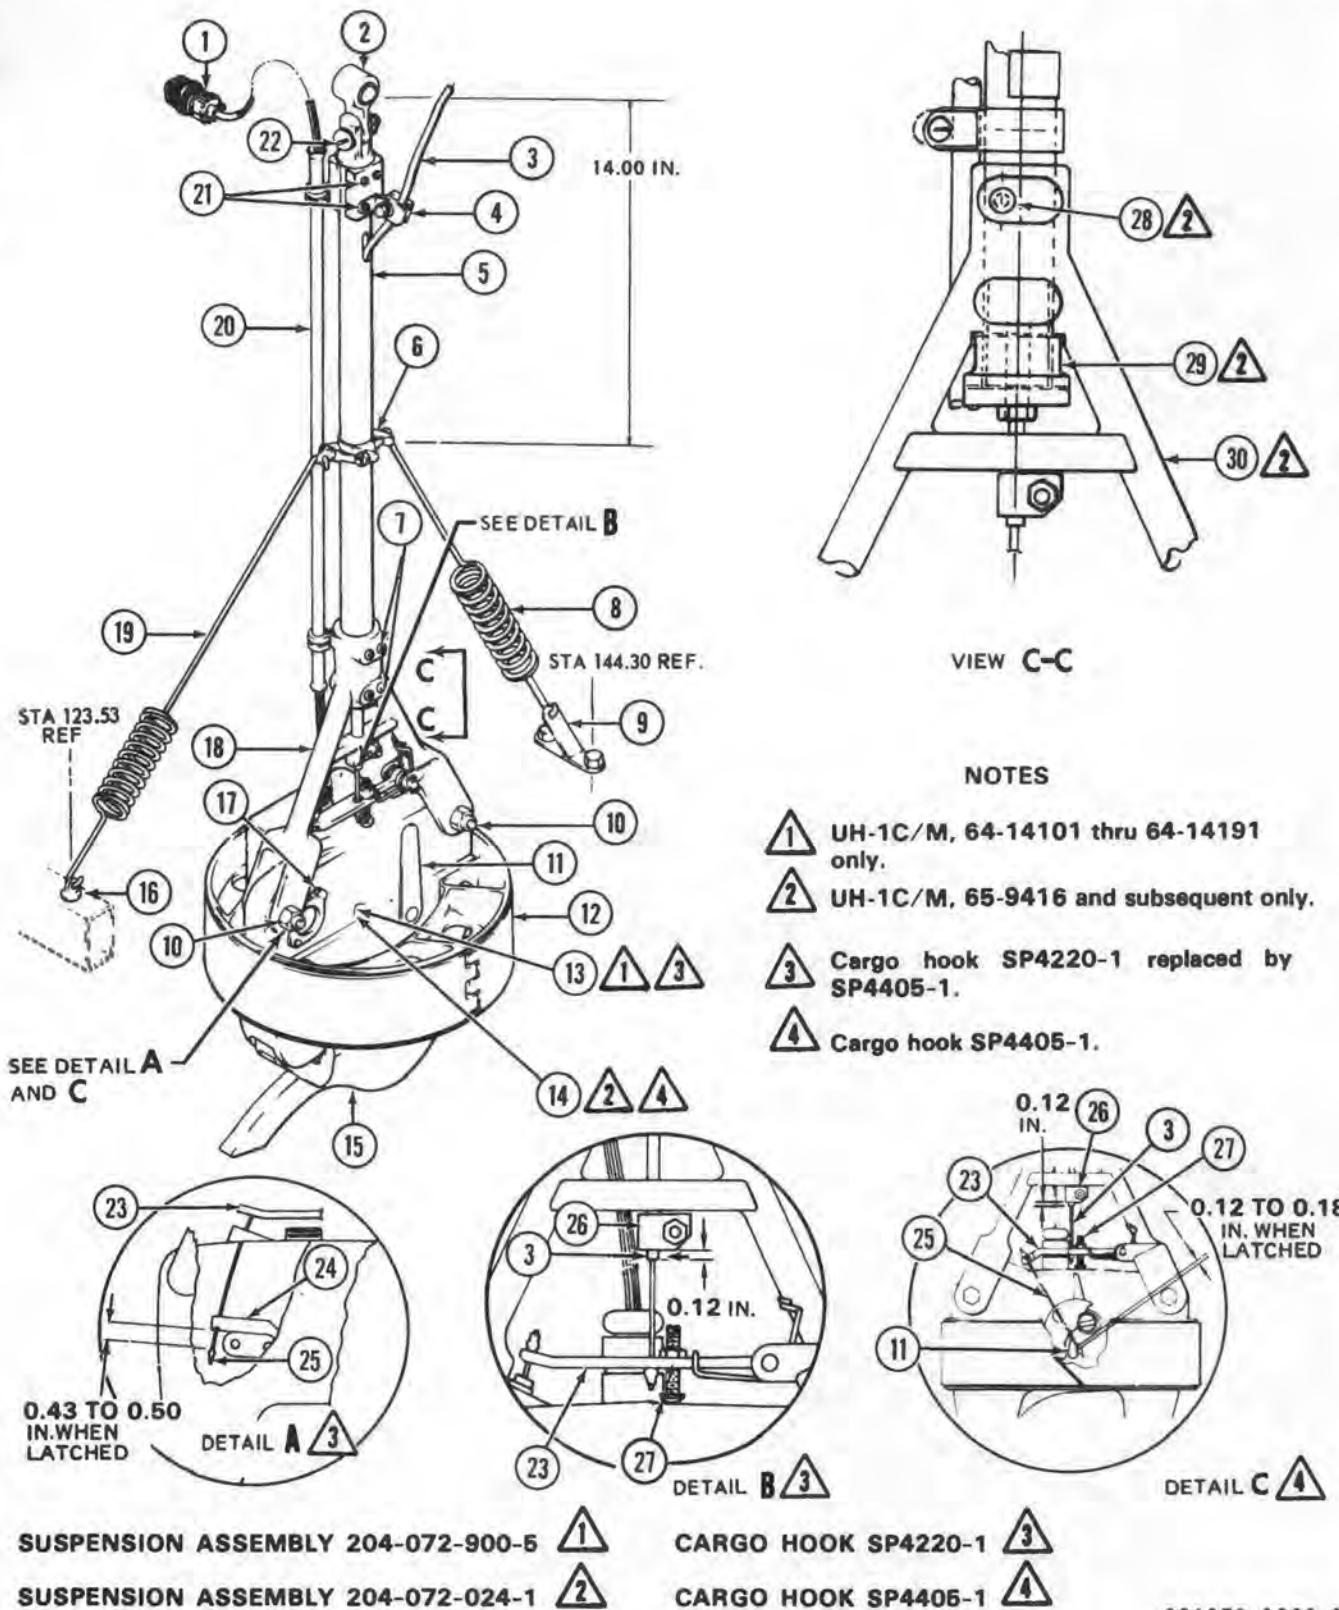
Suspension assemblies (Sheet 1 of 2)
